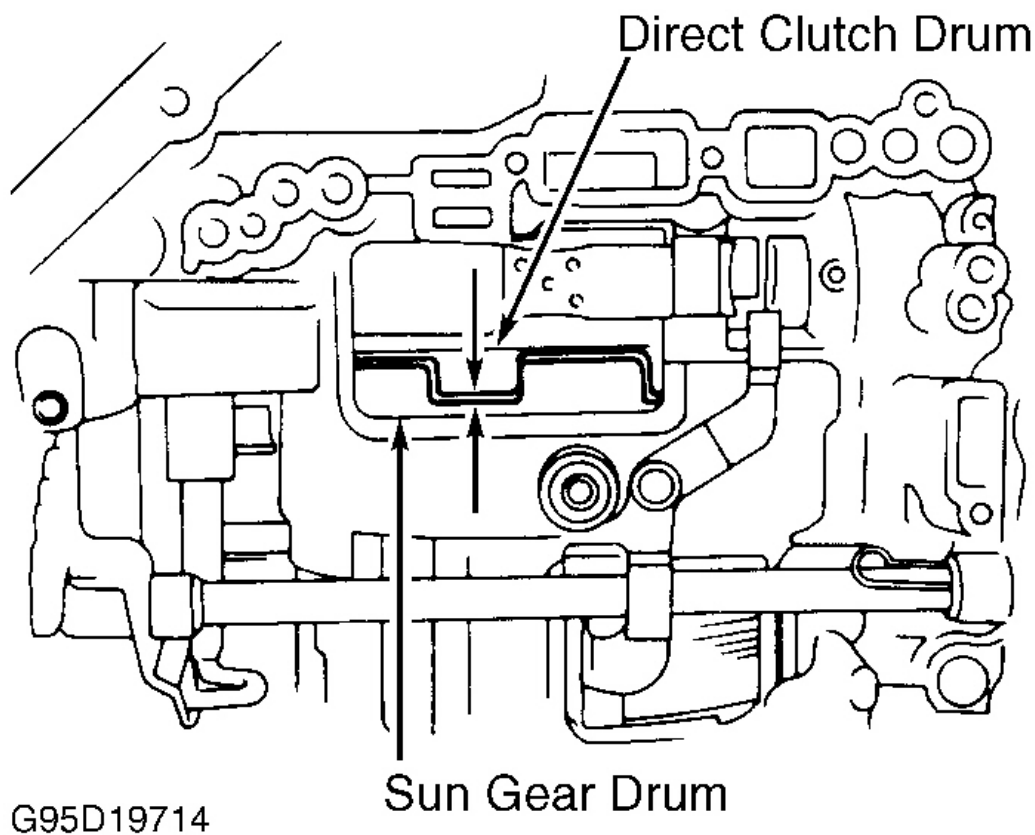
Checking Direct/Forward Clutch Drum Assembly Installation
